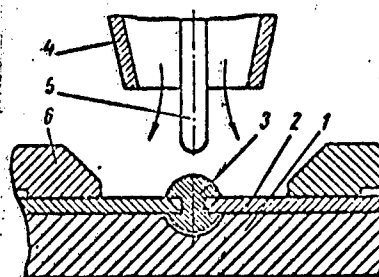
Diagram of welding of SAP, end to end, with a gap, with application of milled wire: 1 -- lining; 2 -- welded plates; 3 -- milled wire; 4 -- nozzle; 5 -- electrode; 6 -- clamps.
